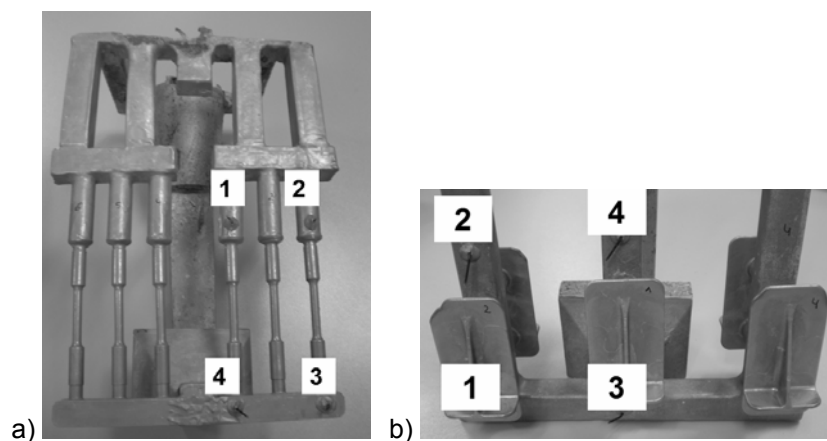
Positions for the thermocouples placed in the investment-cast parts: a) placements in the mould for casting tensile bars; b) placement of the thermocouples in the mould of the prototypes.
